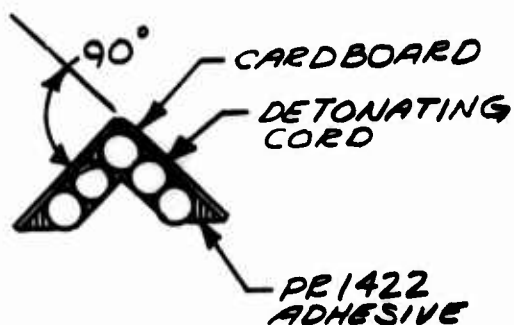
A SKETCH SHOWING THE CROSS-SECTIONAL CONFIGURATION OF ALL DETONATING CORD ASSEMBLIES.
